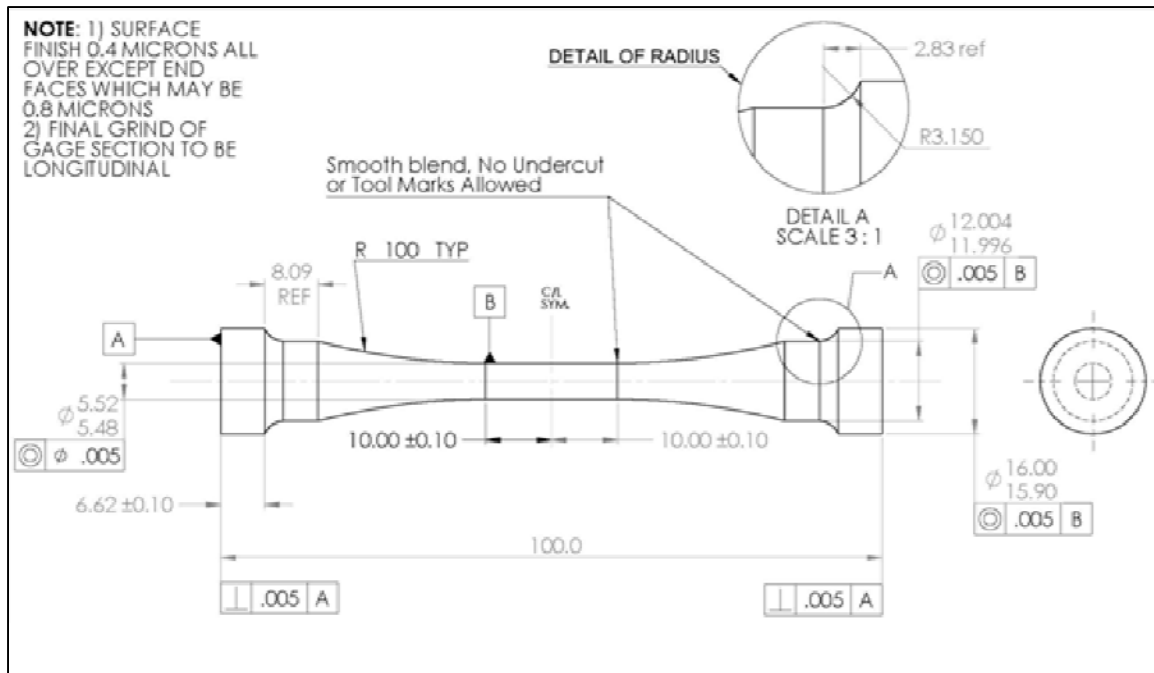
Drawing for 100-mm ceramic tensile specimen with 5.5-mm gauge section diameter.
